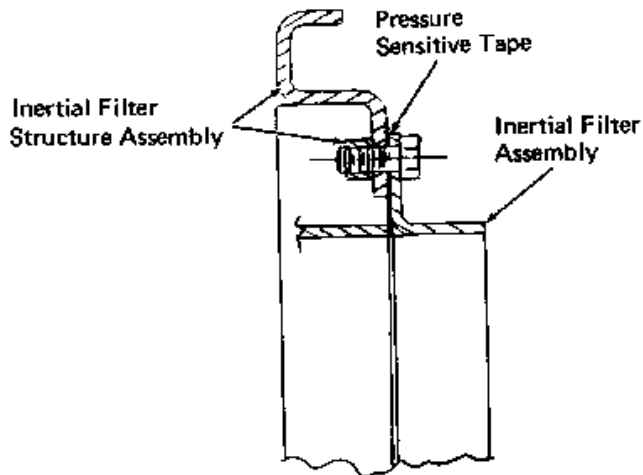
Cutaway Of Inertial Structure Assembly And Inertial Filter Assembly
